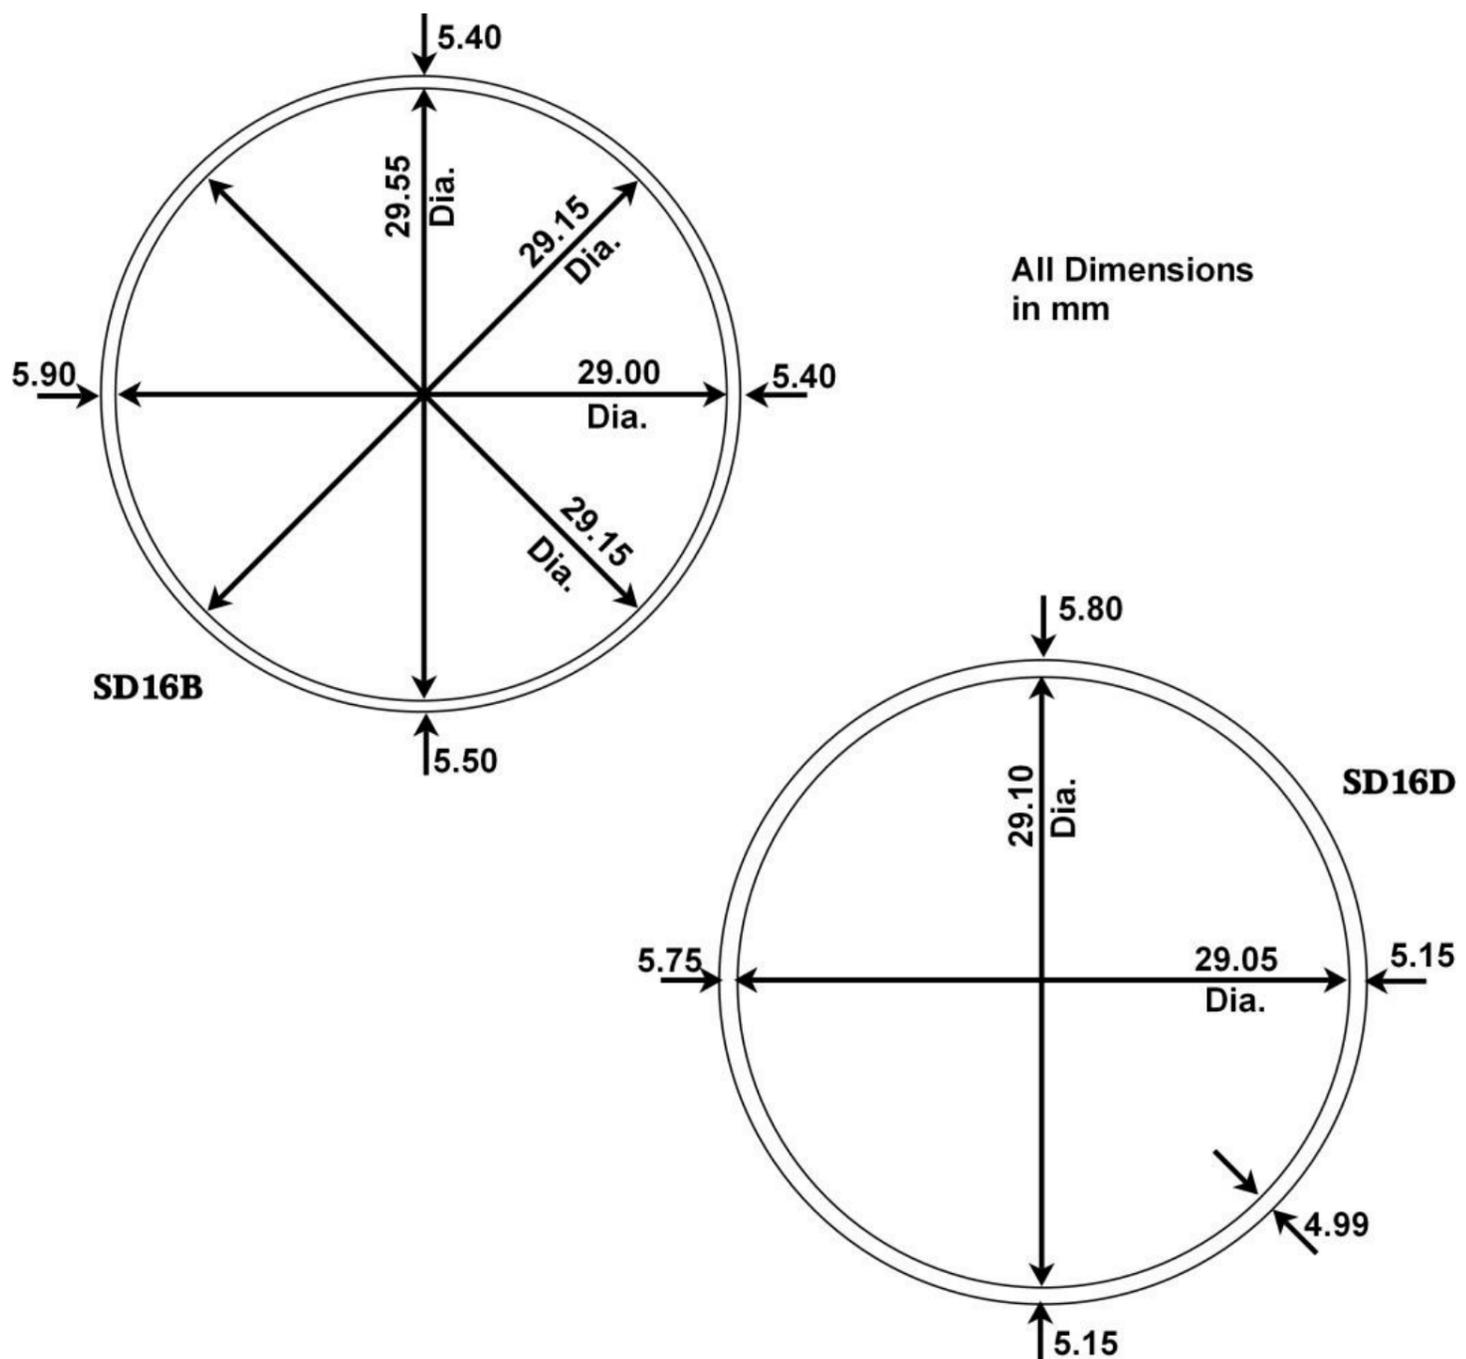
Dimensions of the Drumbest Carrying Rings
